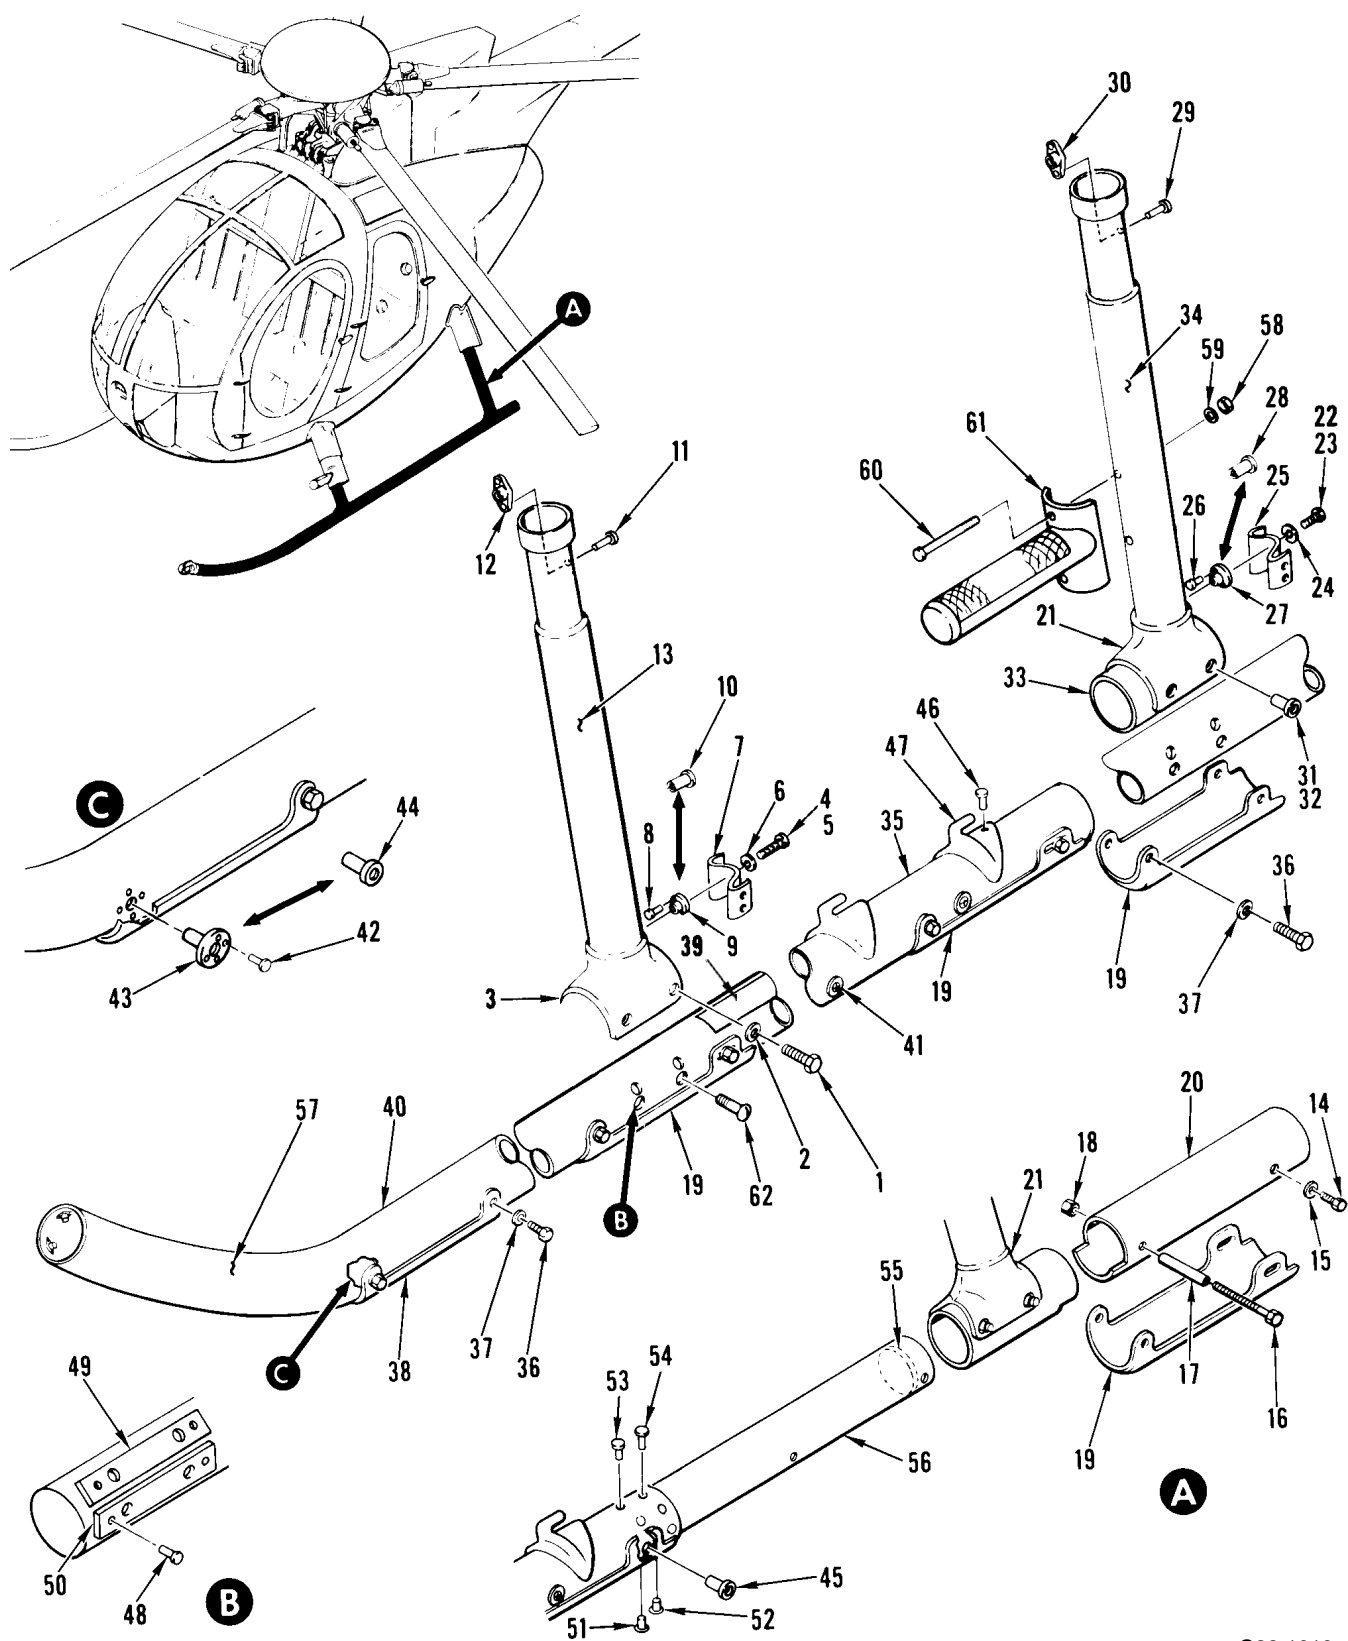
Extended Landing Gear Assembly (Early Configuration)
